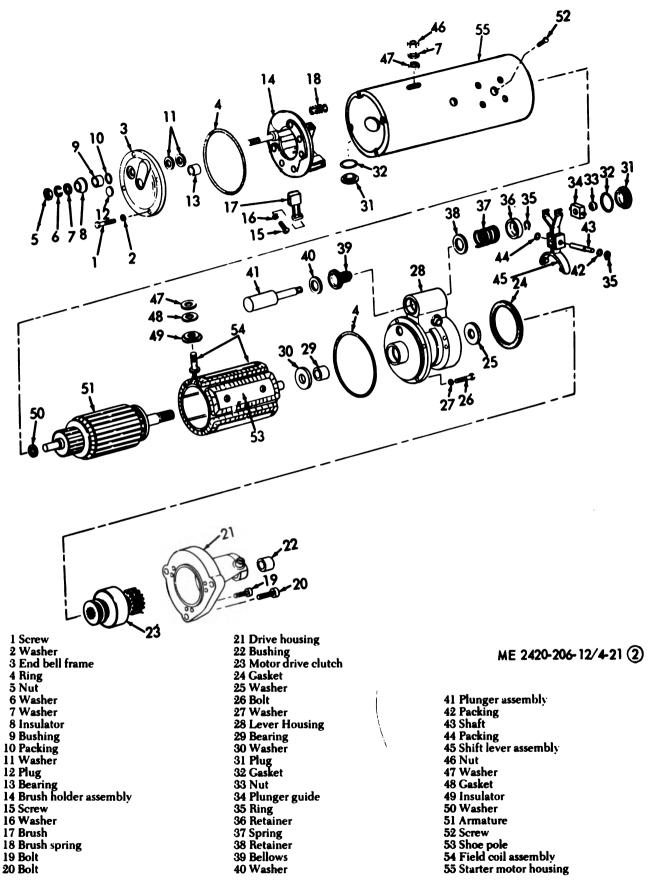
Starter and solenoid, removal, disassembly, reassembly, and installation (sheet 2 of 2).
